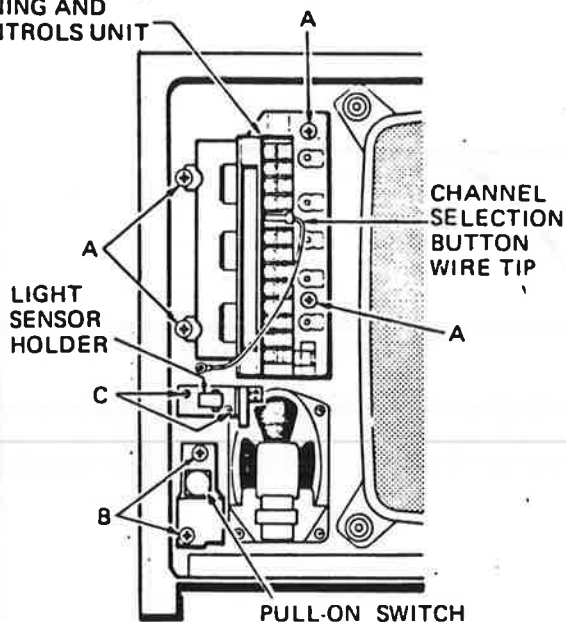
TUNING AND CONTROLS UNIT REMOVAL
